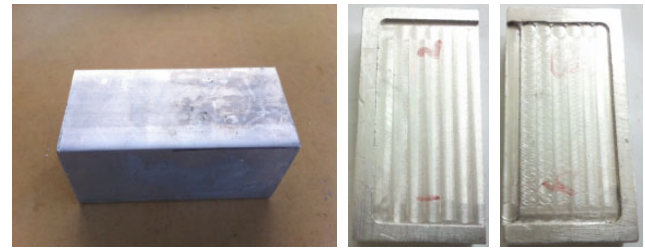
Raw Aluminum Block and Aluminum blocks after machining
